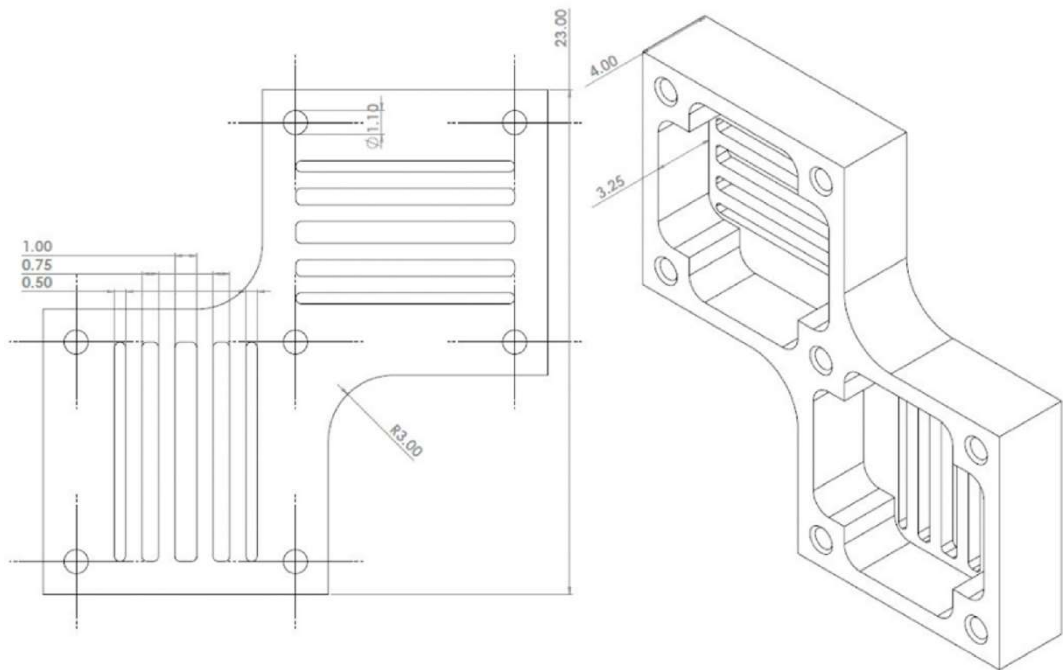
Front (left) and isometric (right) drawings of the 2-Axis mask design.
